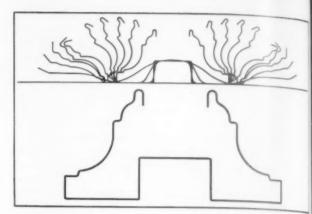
This flower of the successive roll passes required to produce a form aids in development of the finished design.
